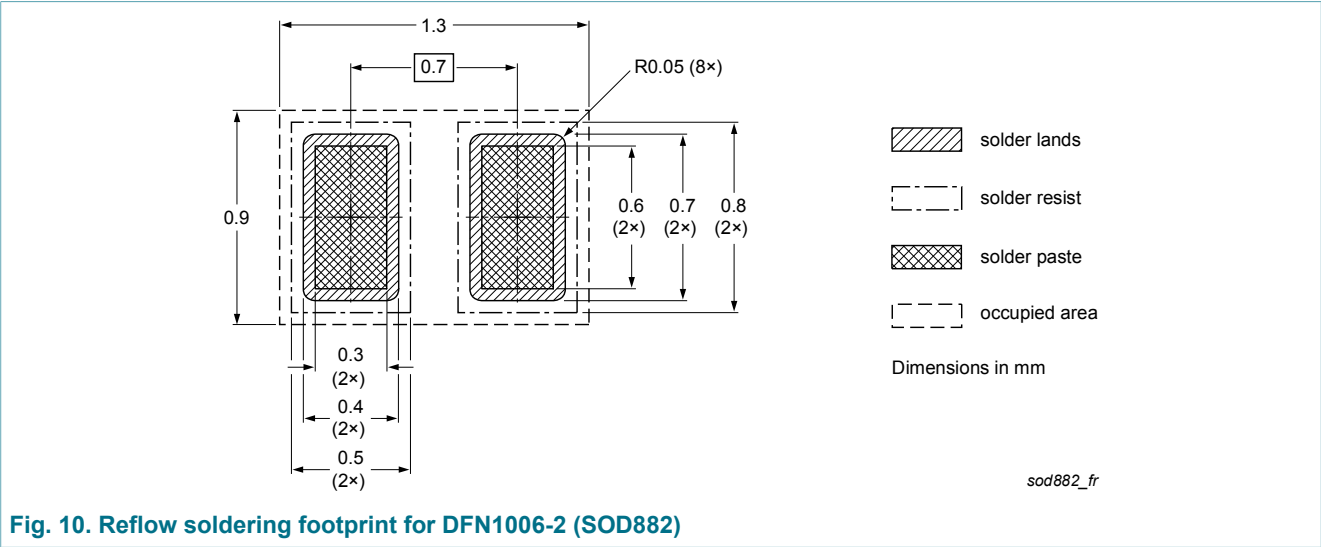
Reflow soldering footprint for DFN1006-2 (SOD882)
